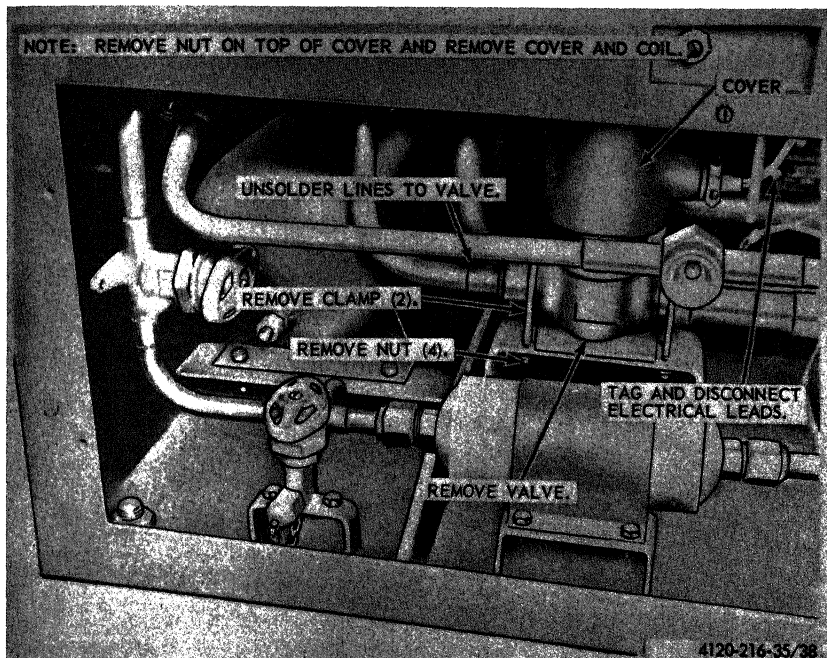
Hot gas bypass solenoid valve and tubes, removal and installation.
